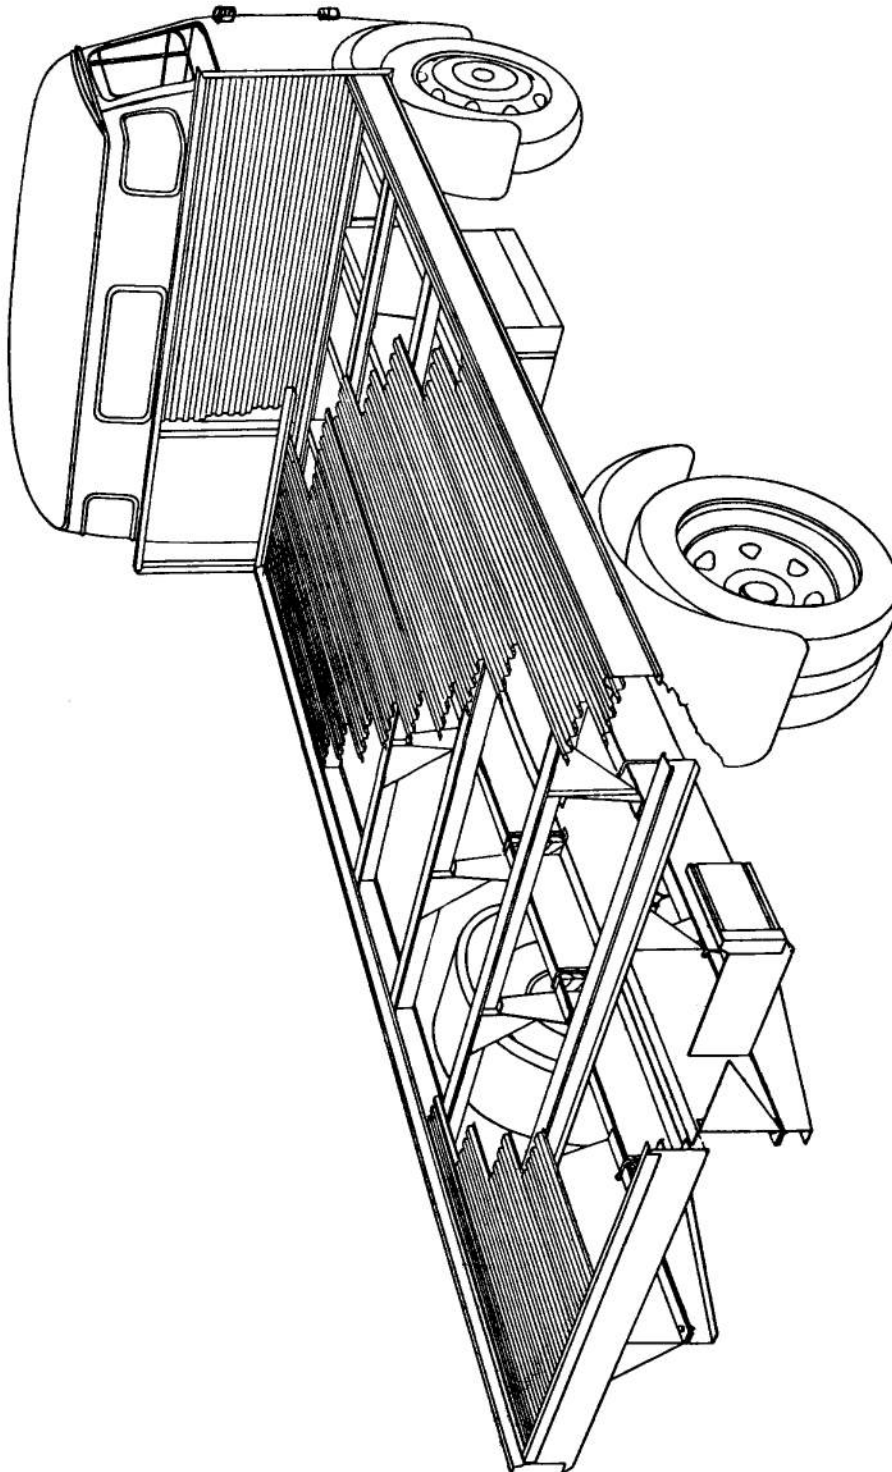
Typical Floor Construction for a Vehicle With Separate Frame and Body<sup>71</sup>
